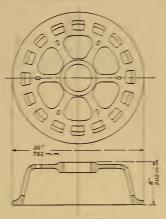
Generator End Frame made on a 54"x66" Plain Jolt-Moulding Machine. The cope and the drag half of the mould are both made on this machine.
